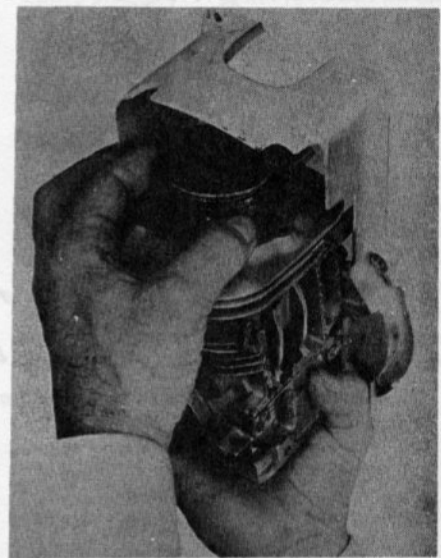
Removing connecting rod and piston assembly from models with removable cylinder head. It is not necessary to remove crankcase cover or crankshaft to remove piston and rod on models with removable cylinder head.
